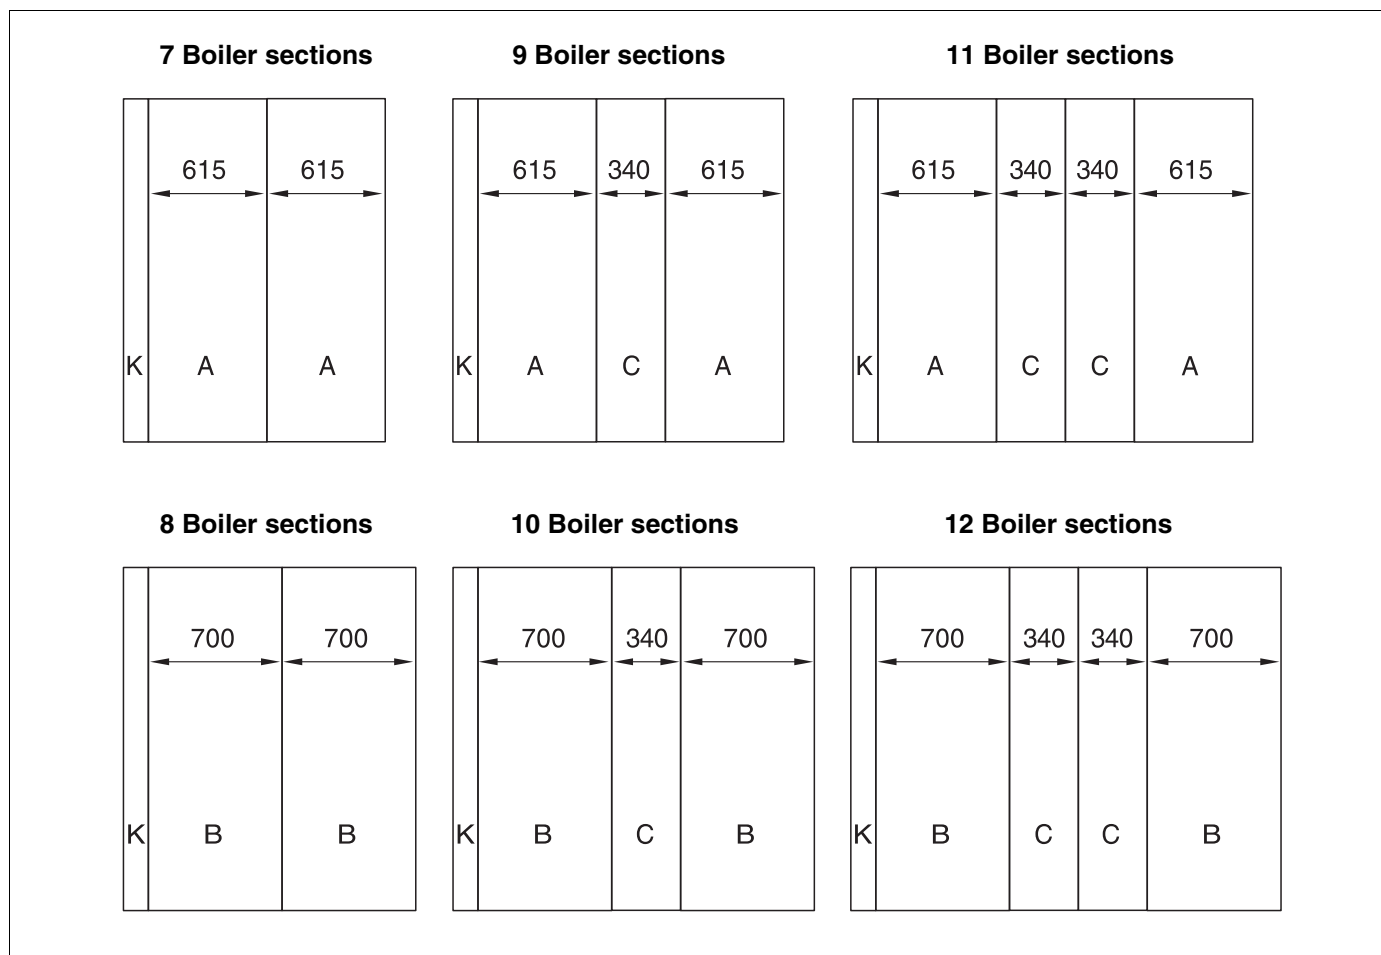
Arrangement of side panels for the various boiler sizes (dimensions in mm)
